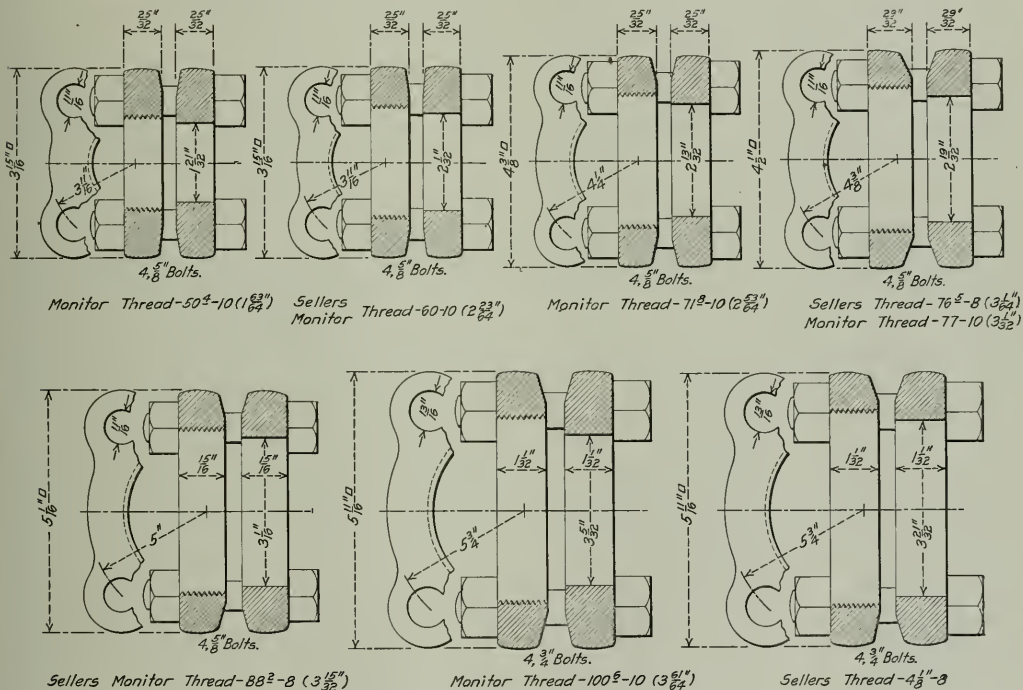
Connecting Flanges for Iron and Copper Pipe
